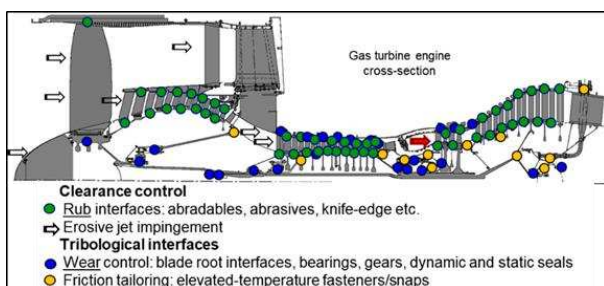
Cross-section of a gas turbine engine showing a wide range of contacting mechanical-assemblies [1].
